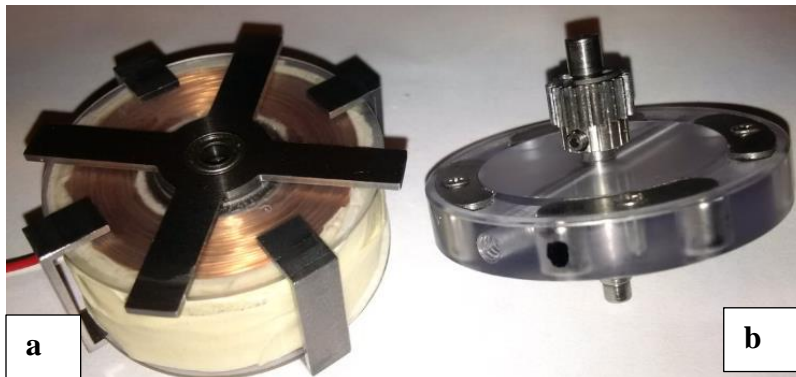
8 - Complete generator assembly: (a) The stator assembly with the top and bottom flanges, core and coil assembly fully installed. (b) The rotor assembly is shown to the right of the figure.
